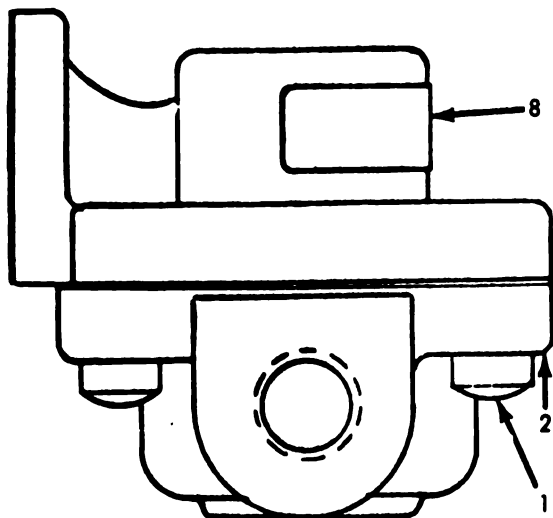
Brake treadle valve, disassembly and reassembly.
